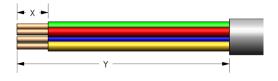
Jacketed Auxiliary Cable Stripping Dimensions
